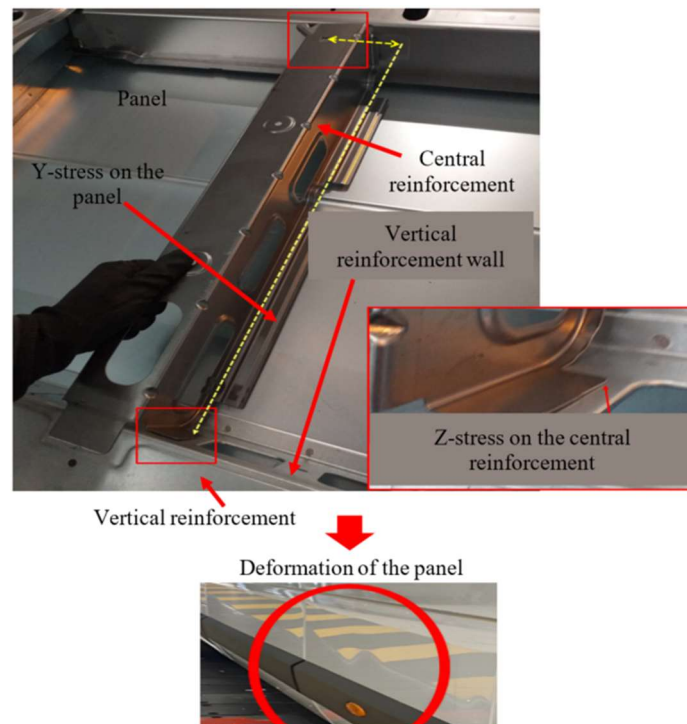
Deformation of the panel following the opening of the vertical reinforcement wall.
